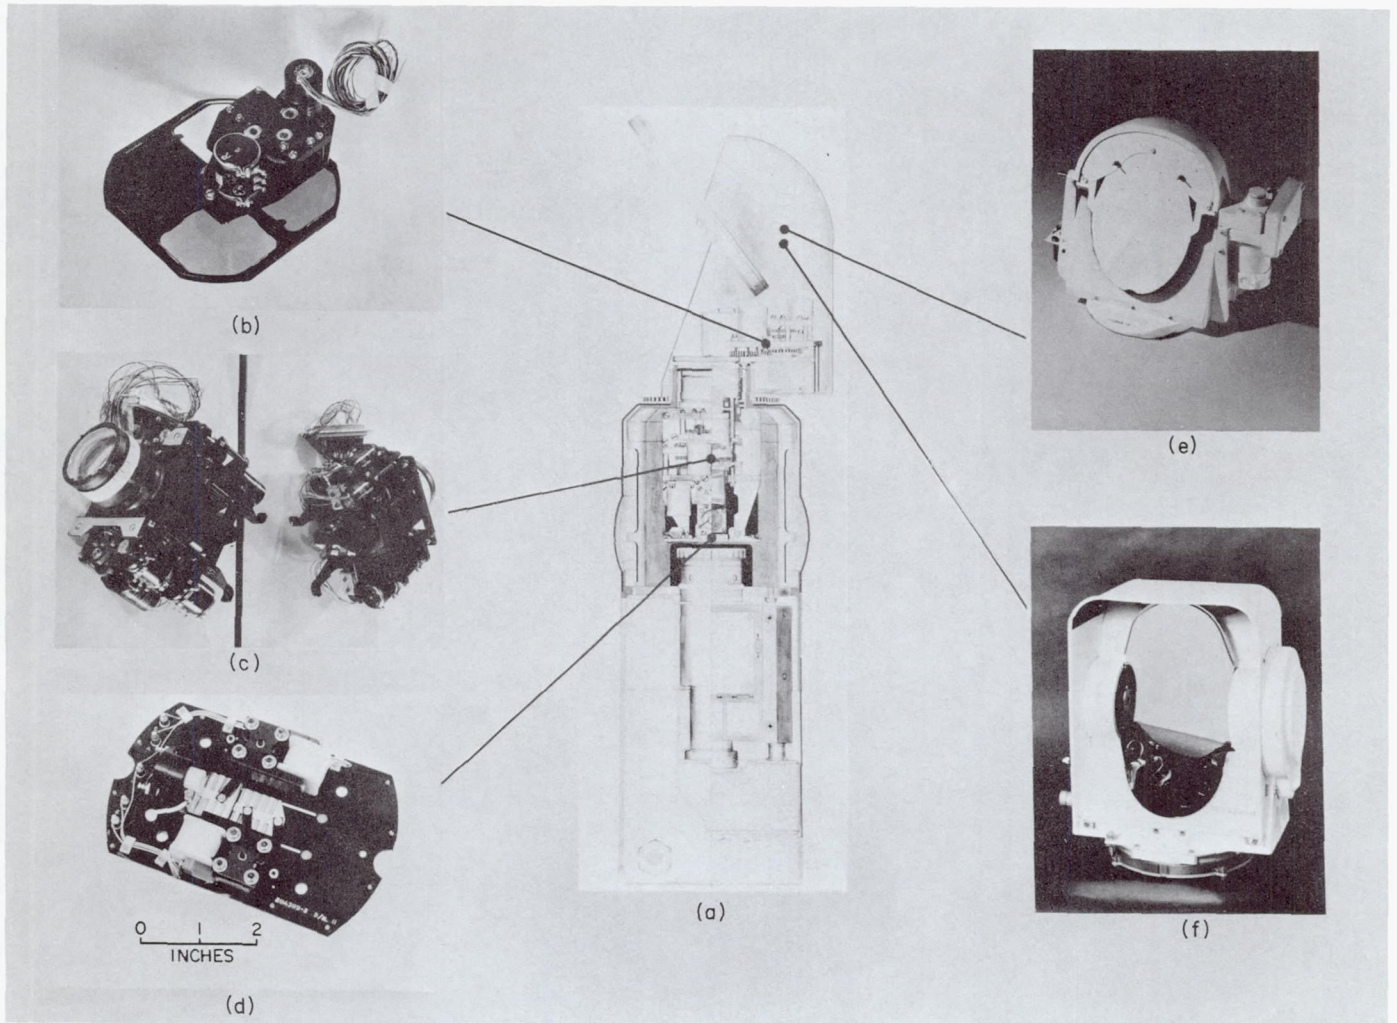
Surveyor camera and components: (a) the complete camera; (b) the filter wheel assembly; (c) the variable-focal-length lens assembly; (d) the focal-plane shutter assembly; (e) the Model A mirror assembly; and (f) the Model C mirror assembly
